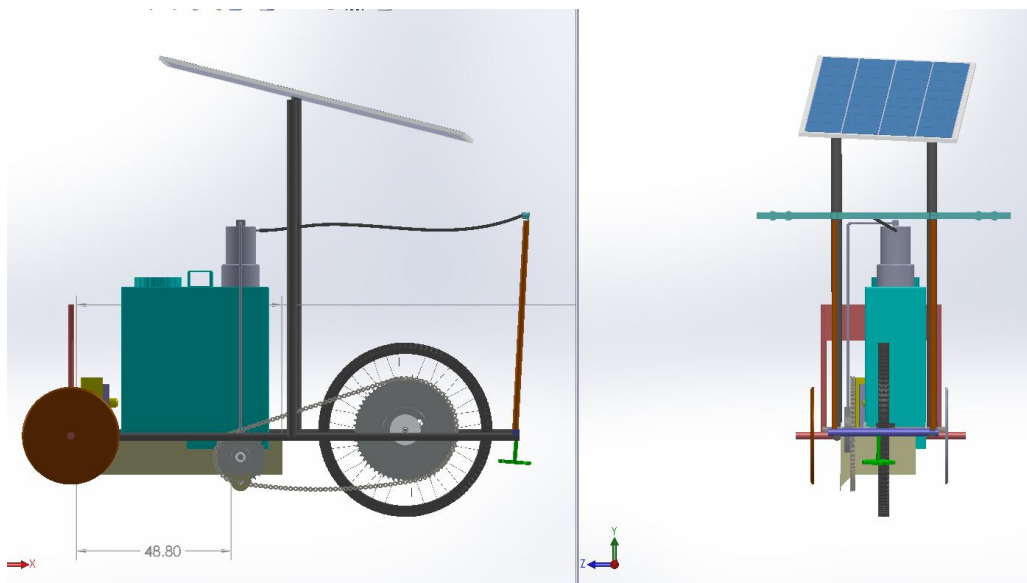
shows a drawing of a wheel sprayer with measurements.
